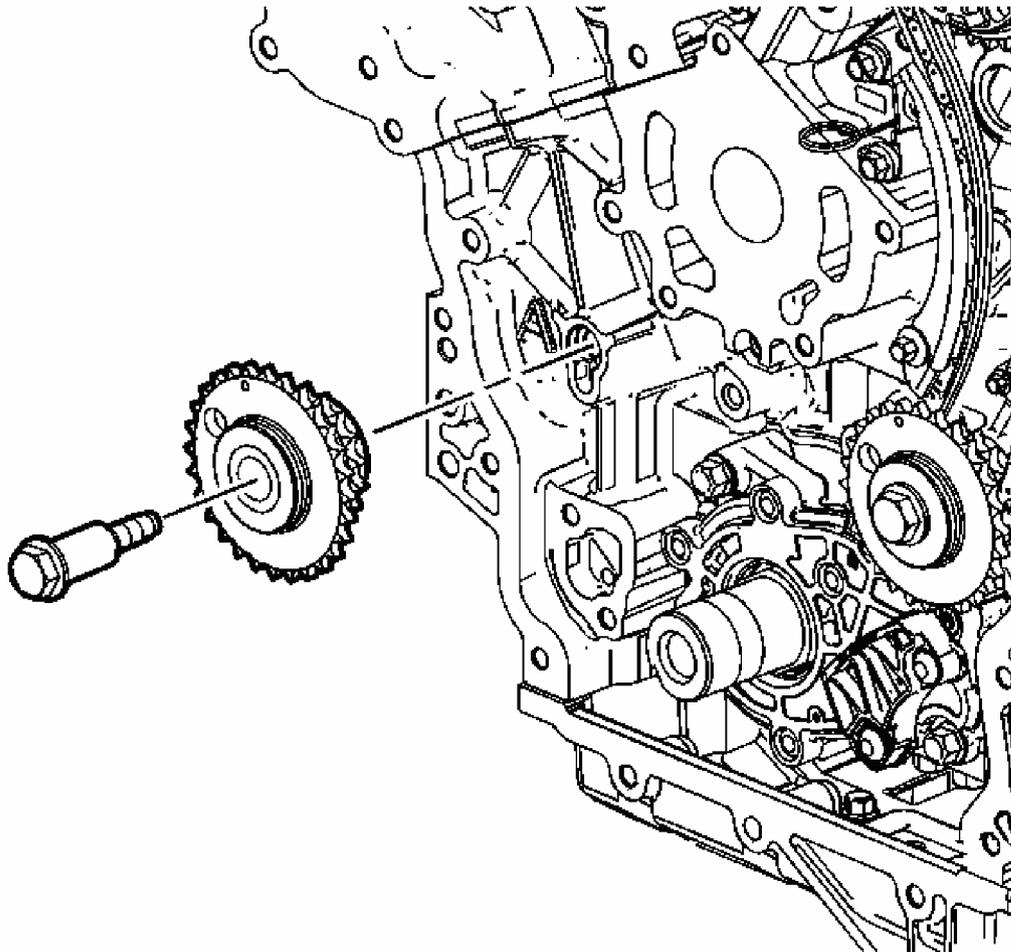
View Of Right And Left Camshaft Intermediate Drive Chain Idlers
